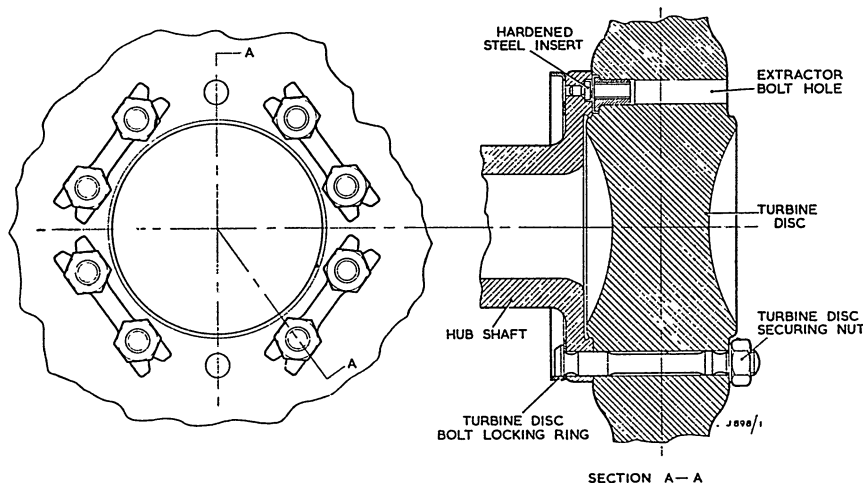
Turbine disc securing bolts and nuts, and method of locking (Pre-mod 398)
